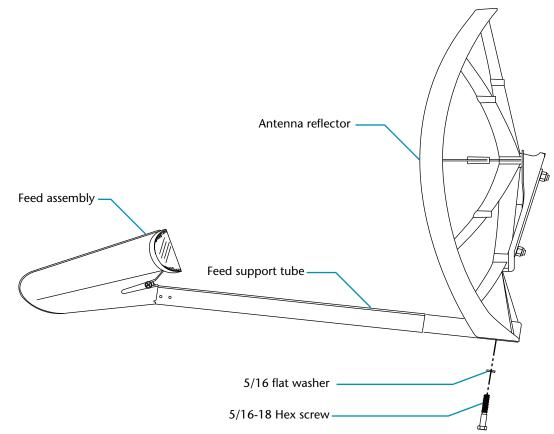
Installing feed assembly and feed leg onto antenna reflector
